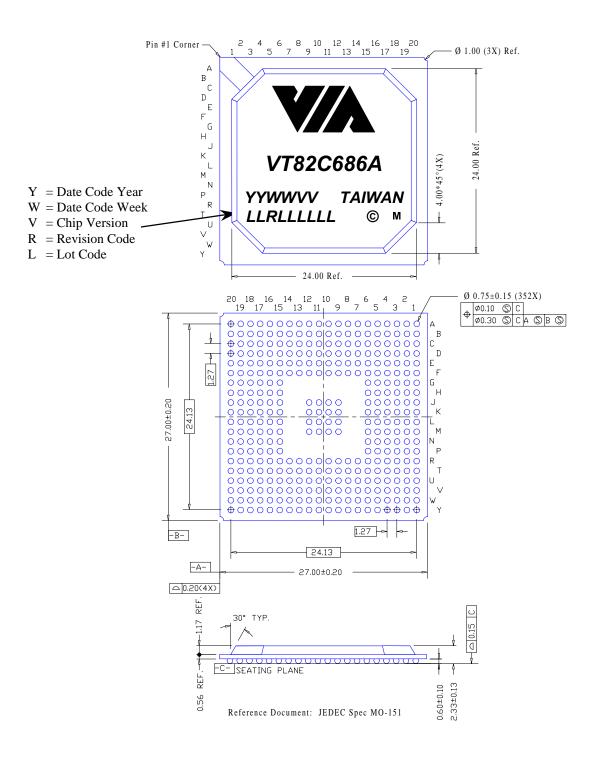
Mechanical Specifications – 352 Pin Ball Grid Array Package
